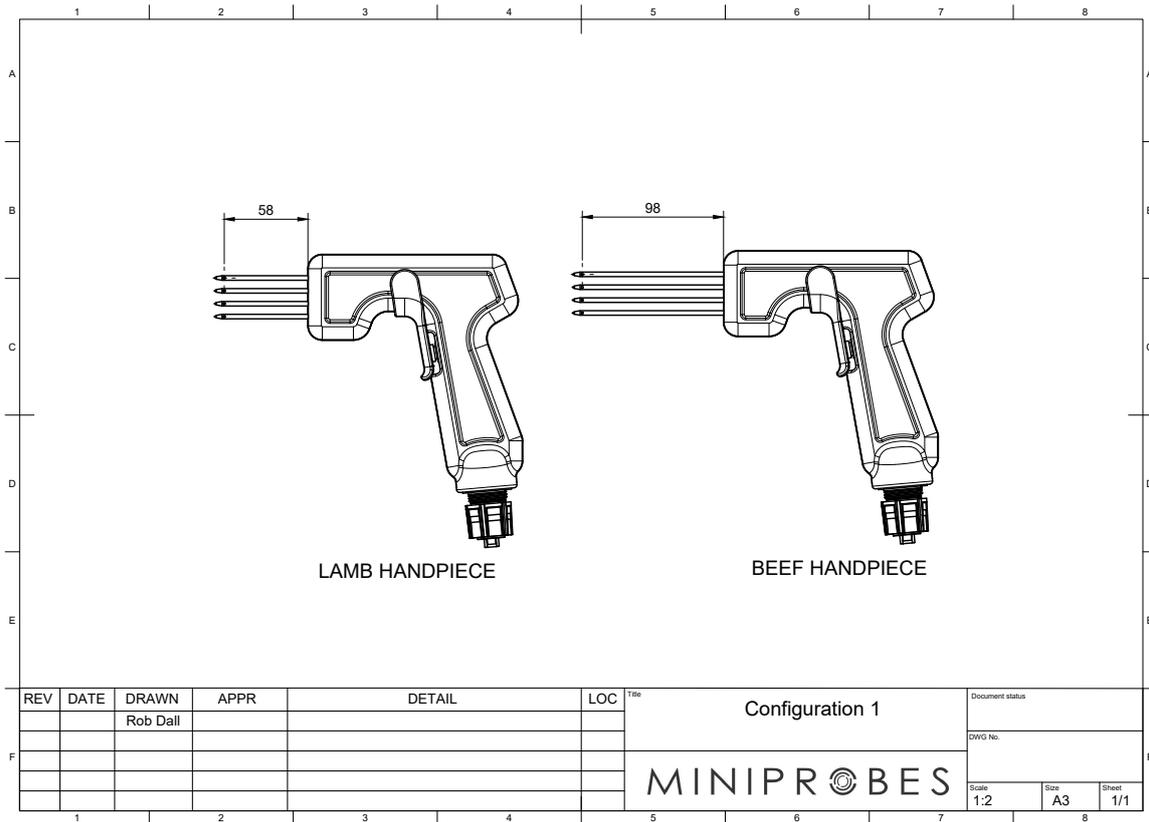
(left) lamb handpiece with 58mm long needles. (right) Beef handpiece with 98mm needles for imaging deeper into muscle.
